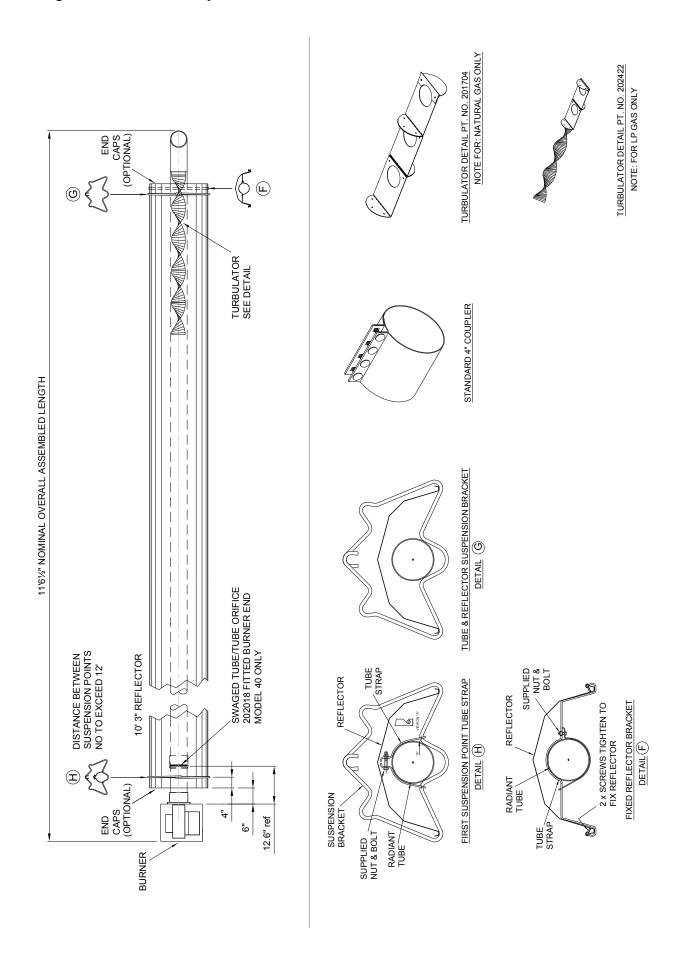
Heater Assembly: Model Linear 40-S20, 60-S20, and 80-S20.
